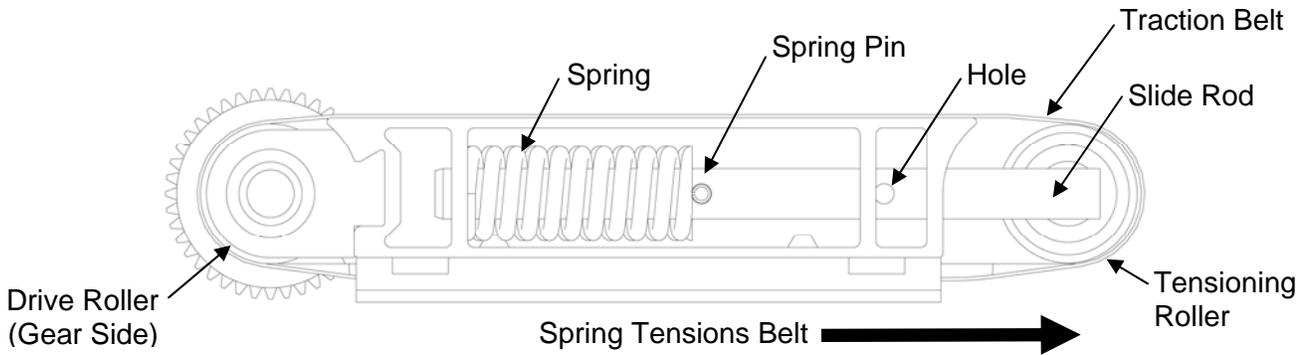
SIDE VIEW OF THE BELT TRAY TENSIONING MECHANISM
